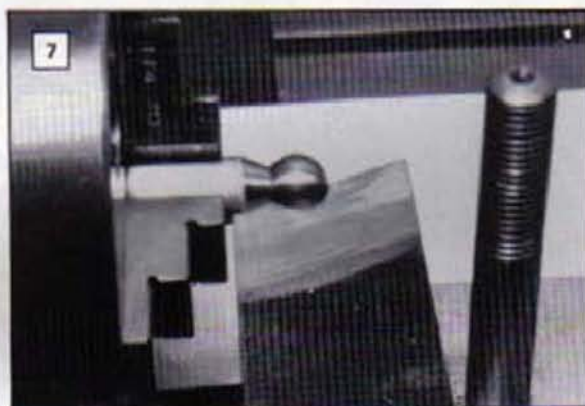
The cutting tool for boring the taper - in this case a modified half-round tool is excellent. Photo 6. The tool in action taking a smoothing cut. Photo 7. Turning ball with formed tool (top clamp removed).
